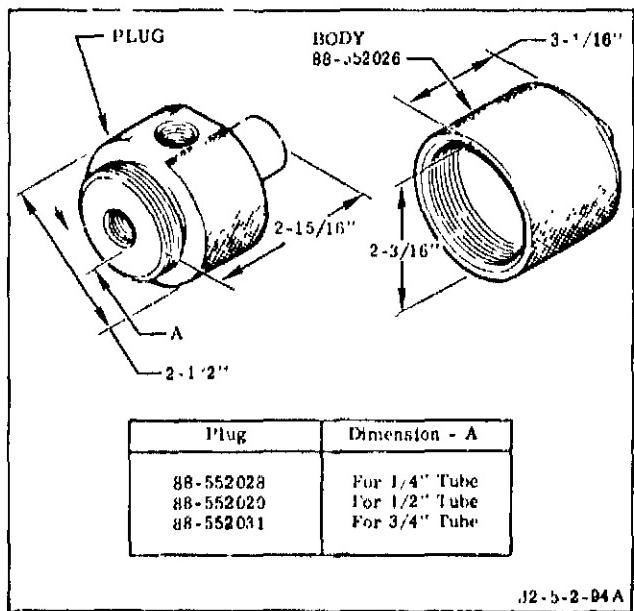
Vent Port Check Valve Test Fixture Body 88-552026 and Plugs 88-552028, 88-552029, and 88-552031
